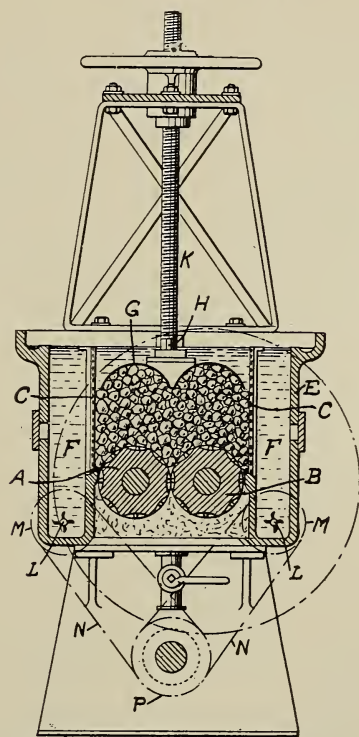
SECTIONAL VIEW OF THE DESSAU WASHER.
